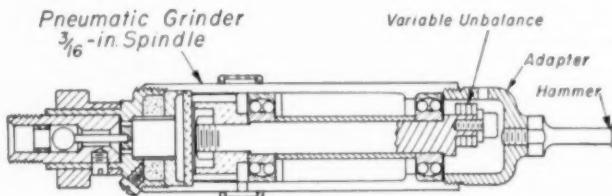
Standard Pneumatic Portable Grinder Converted to a Peening Tool by Incorporating a Centrifugal Unbalance on the Shaft (Research Laboratories Div., General Motors Corp.)
